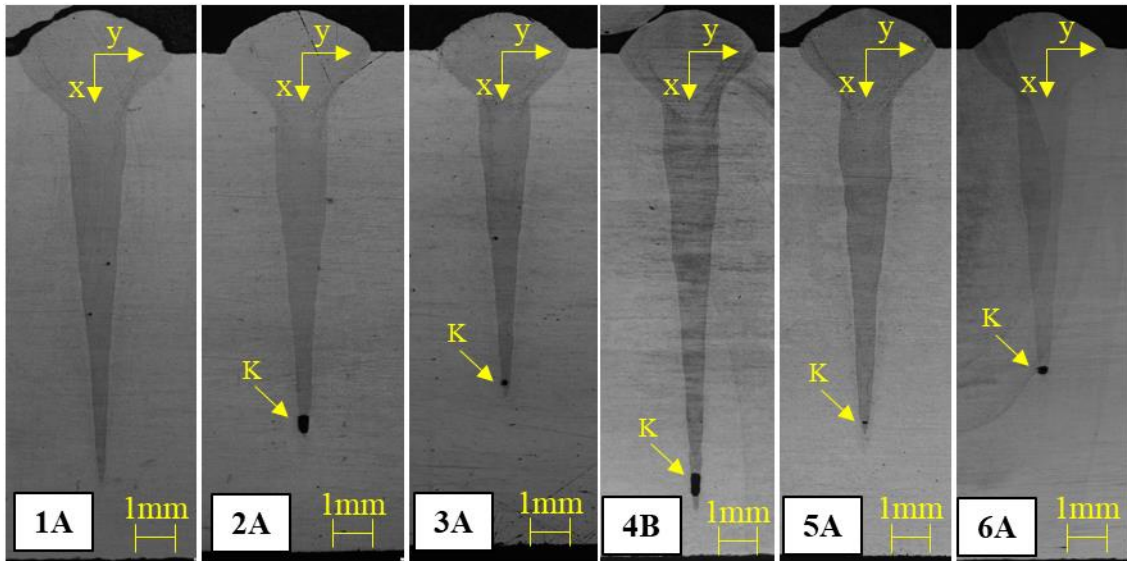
Weld geometry for SLM+HIP+EBW samples 1A - 6A; K – Keyhole root void
